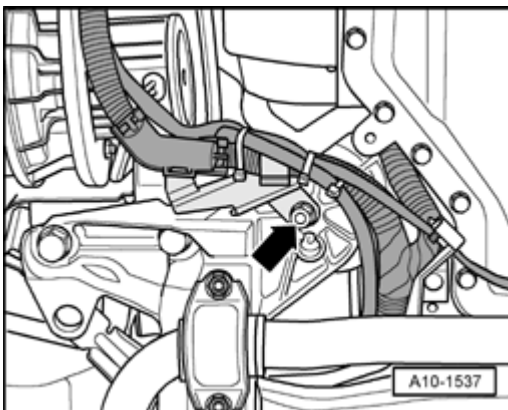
Removing Wiring Harness Bracket At Right Engine Mount Plate
